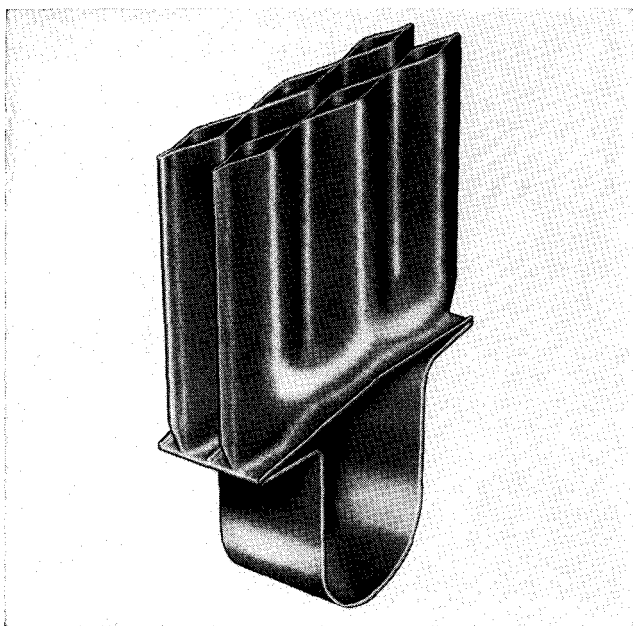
Radiator Section Showing Joints Formed With Outside Welds
